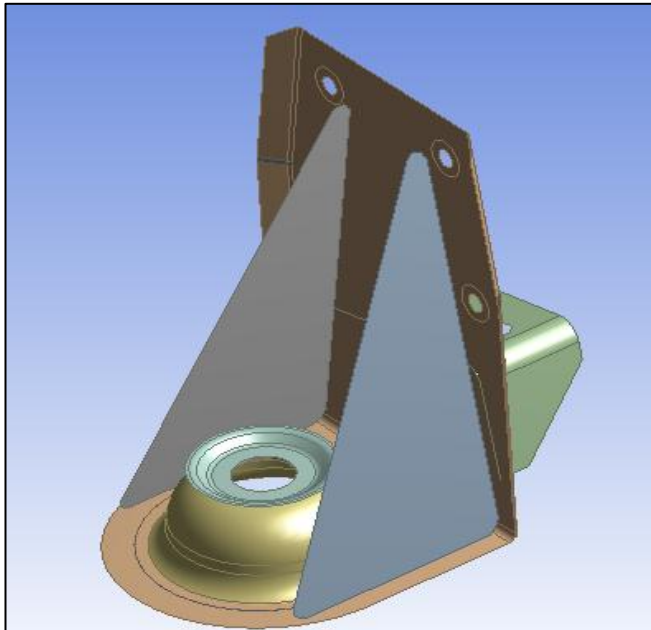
Sheet metal extracted from iges cabin mounting bracket
